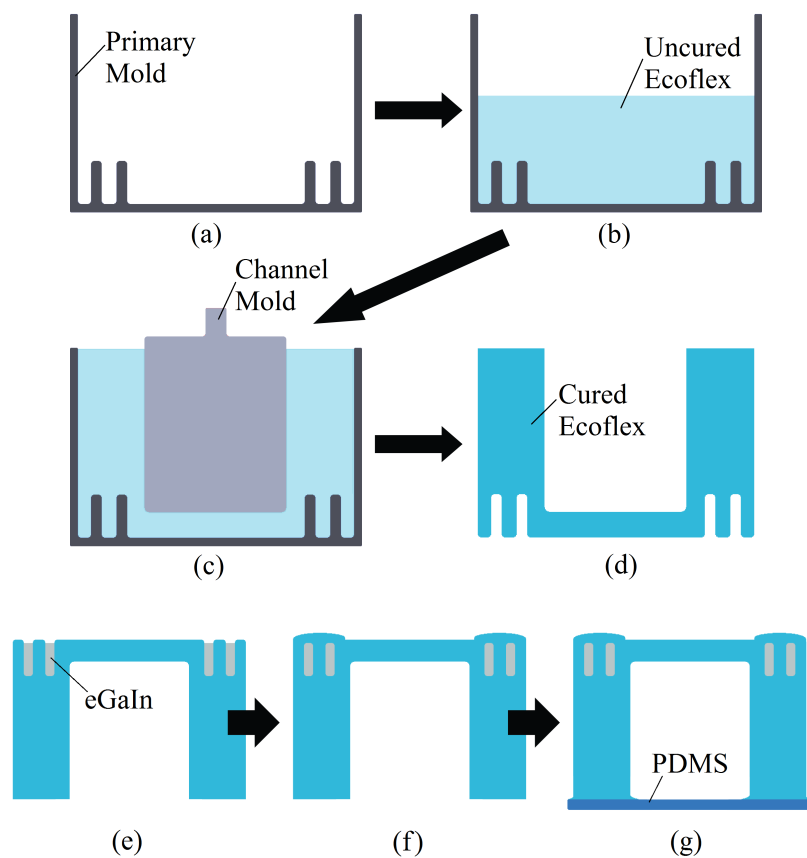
(a) The bottom half of the mold is printed and (b) filled with liquid elastomer. (c) The channel mold (previously printed) is embedded inside the liquid elastomer to create the pneumatic channels. When the elastomer has cured (d) the mold can be removed from around it. To finish the sensors, (e) the eGaIn channels are filled with liquid metal and (f) sealed with liquid elastomer. Finally, (g) the pneumatic channels are sealed by bonding the body to a thin layer of Silgard 184.
